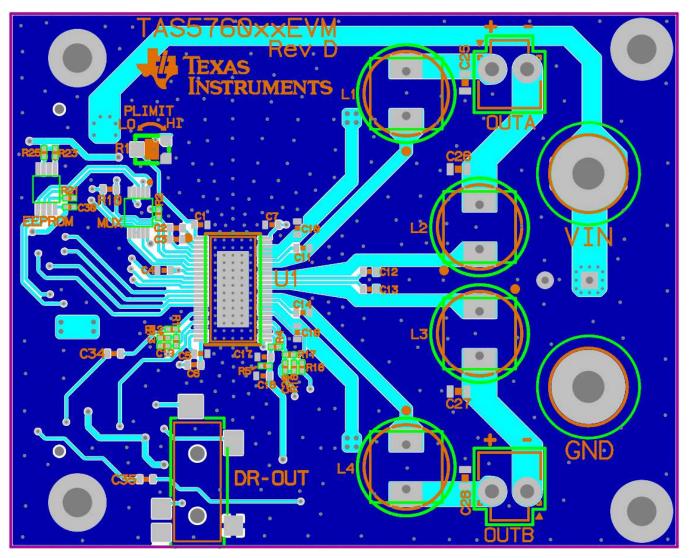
TAS5760xxEVM Rev D Top Composite Assembly
